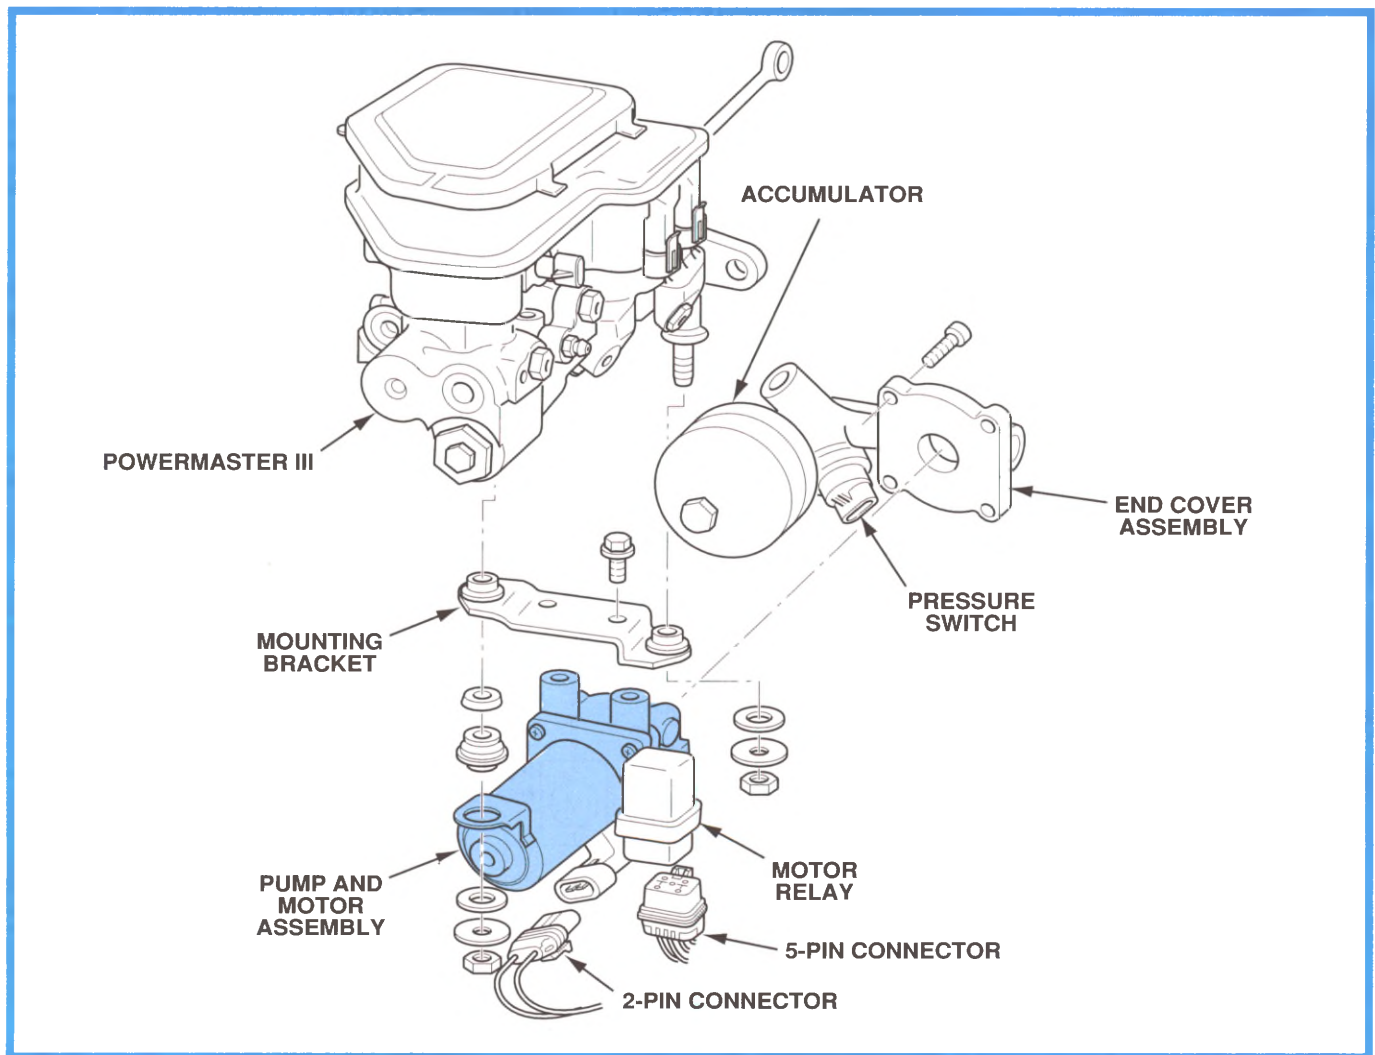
, Pump Motor Assembly (Delco Moraine III Shown)
